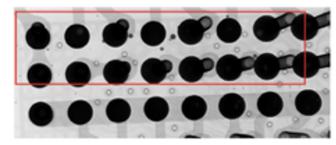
Solder Balling with Solder Joint Encapsulant Material B on DDR4 TV
